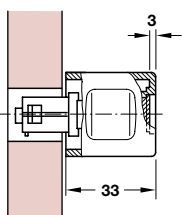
mm fixed or lock handle with 1.2 mm cover plate
